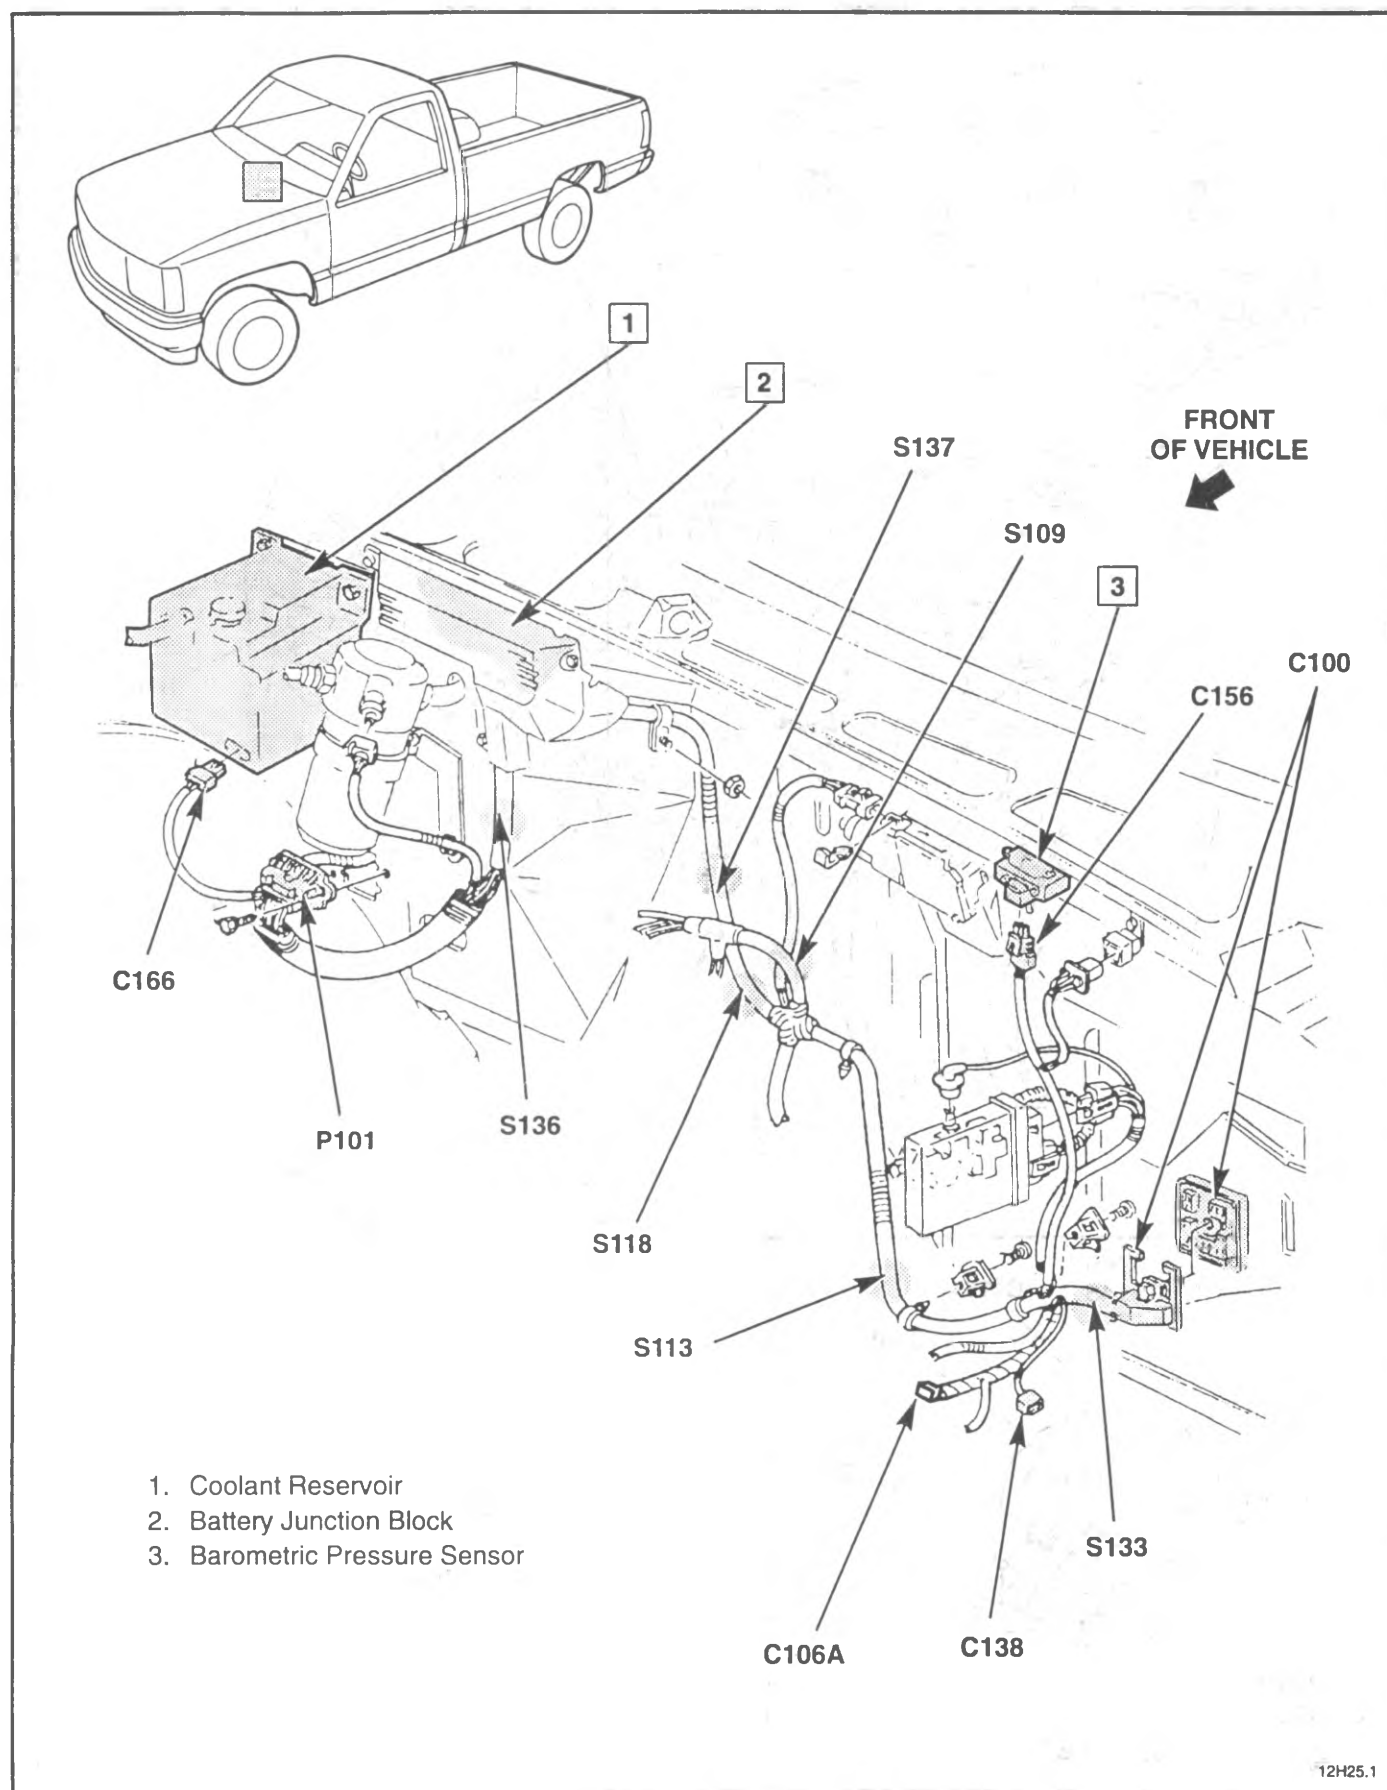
Cowl Wiring, (6.5L) Diesel Engine
